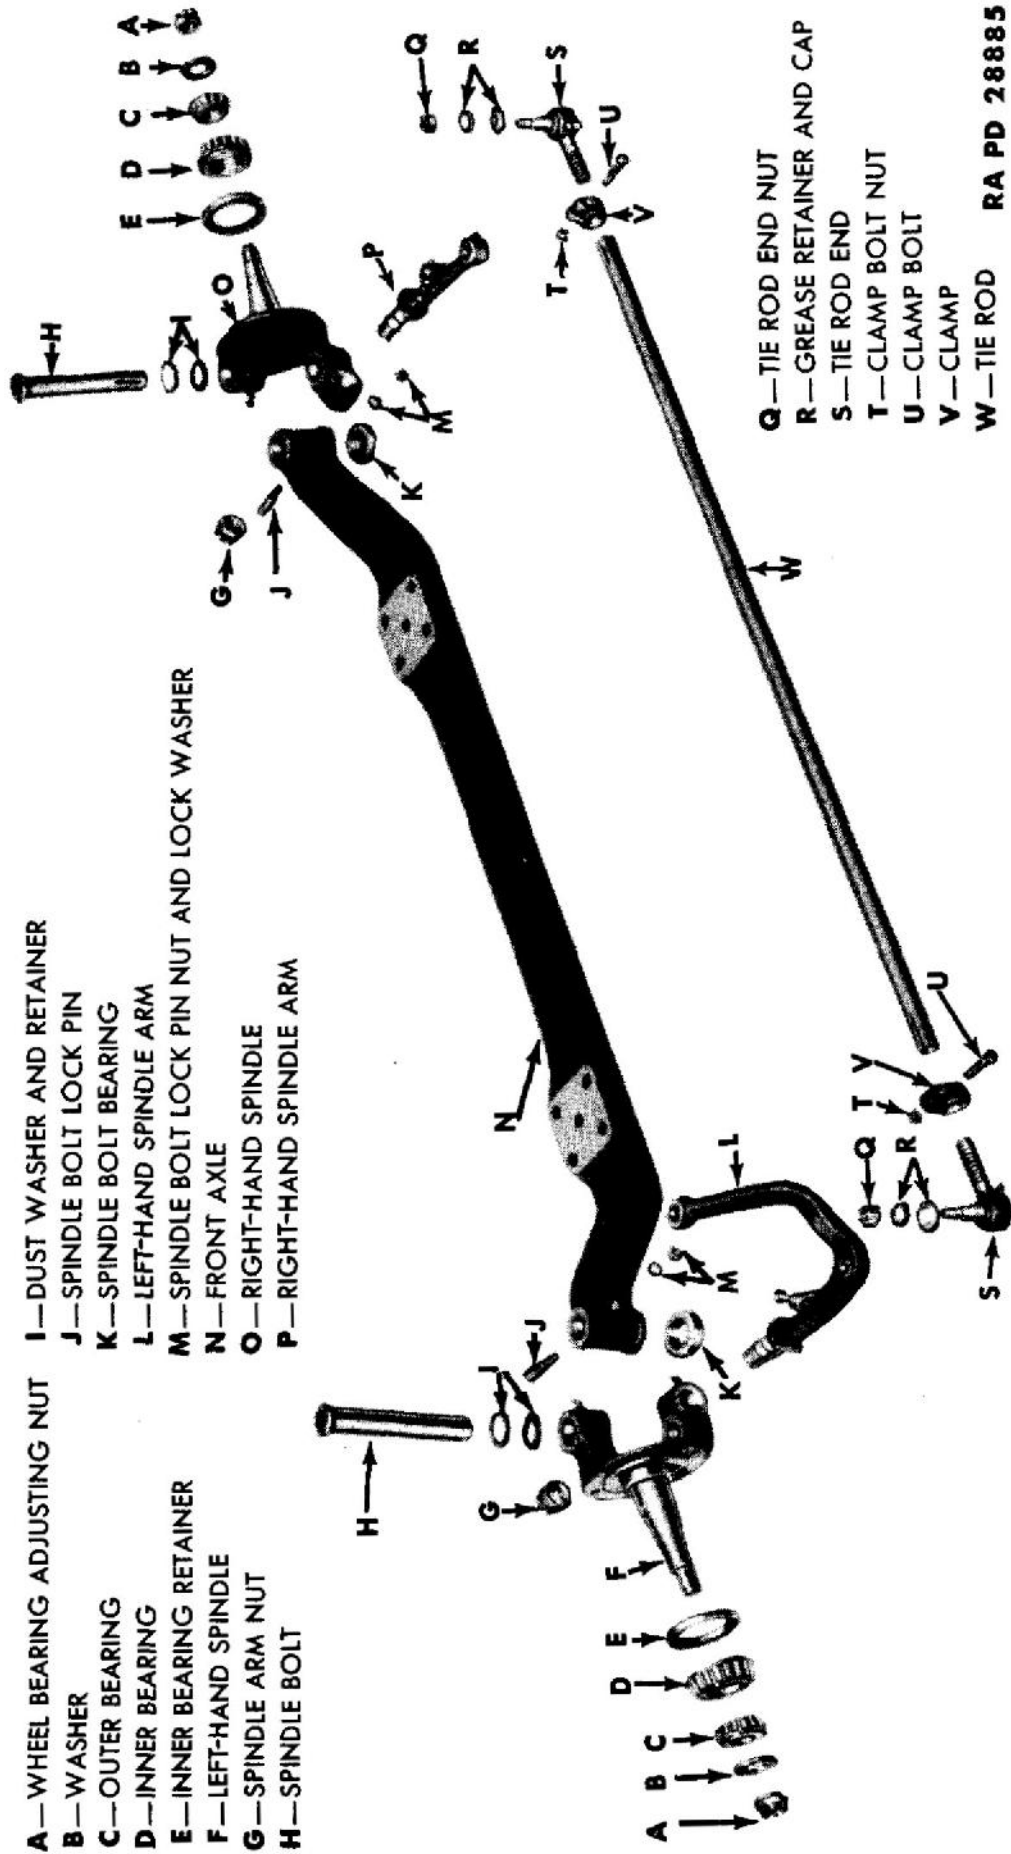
Front Axle, Spindles, and Tie Rod — Disassembled
